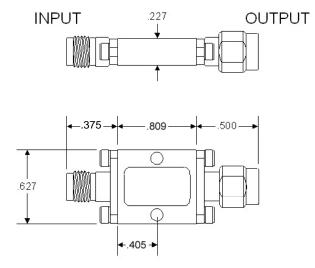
Coaxial package mechanical dimensions. Input and output are labeled on the coaxial package.
